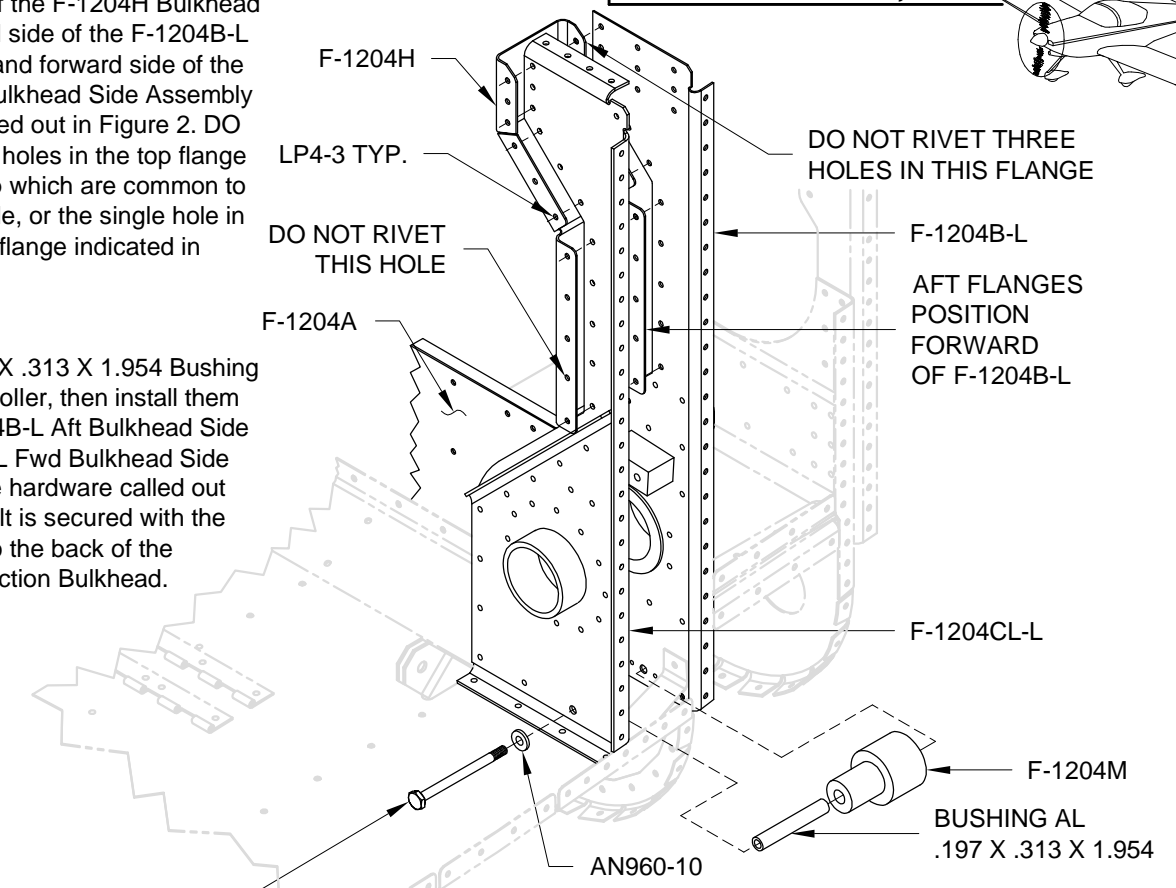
LEFT BULKHEAD CAP AND ROLLER
